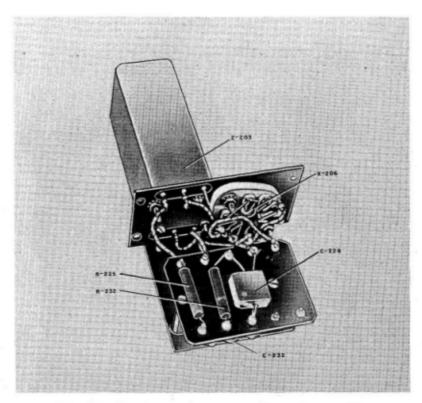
· Receiver 3rd I-F Assembly — Bottom View
